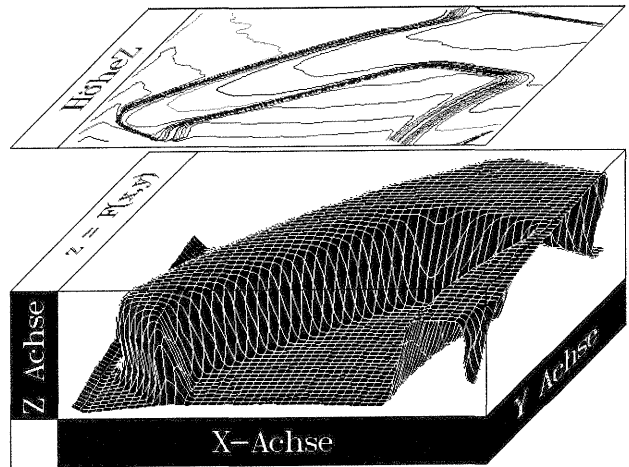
Typical Workpiece Scanned by 4D-LM
